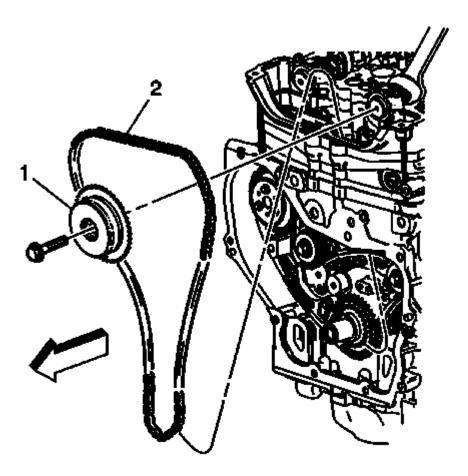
Intake Camshaft Actuator And Timing Chain Courtesy of GENERAL MOTORS COMPANY
